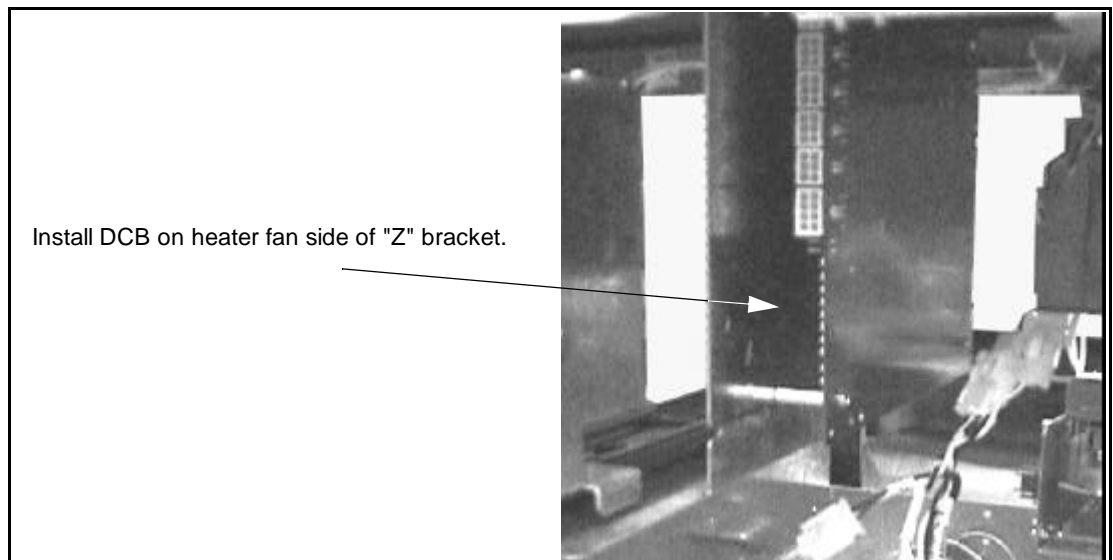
DCB Mounted in Vista Printer Base PN 886208-001 (Viewed from Side 2)
